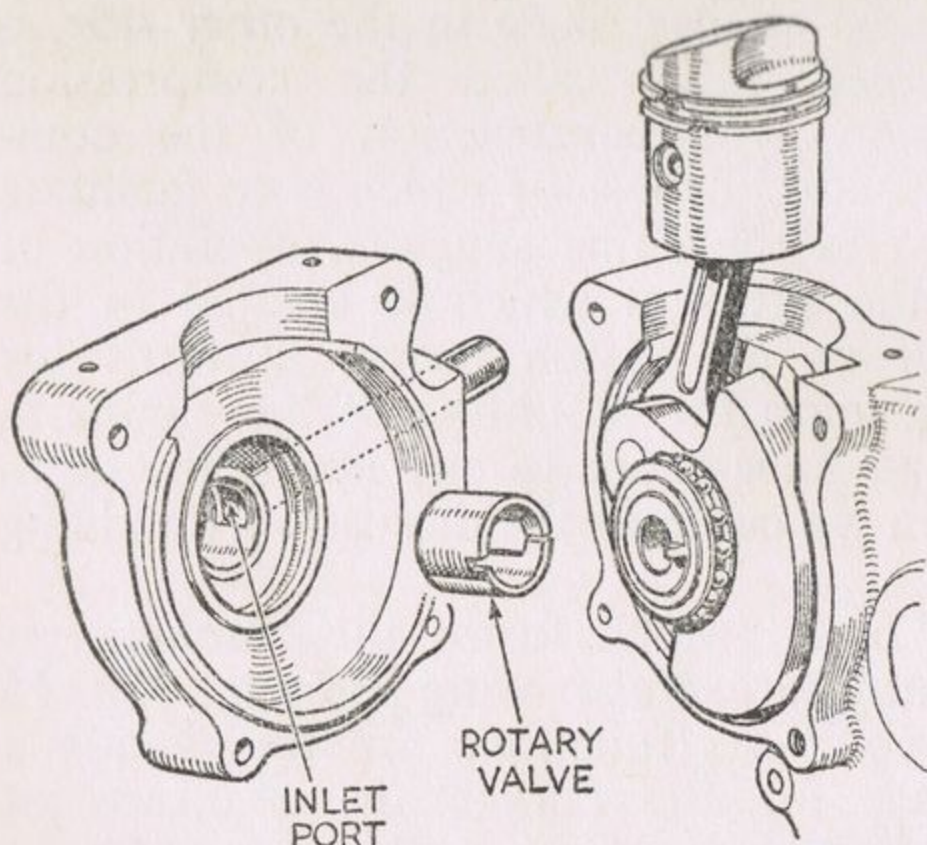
How the crankshaft assembly is mounted in the crankcase
